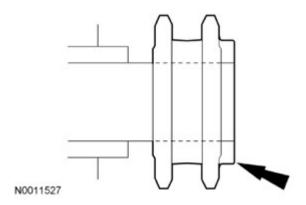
Locating Crankshaft Sprocket Flange Faces Forward Courtesy of FORD MOTOR CO.
